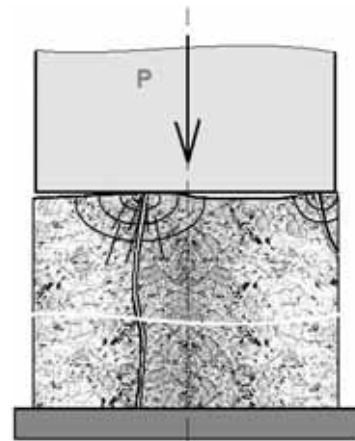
Chipping and destroying during axial test on fracture of sintered piece of uranium dioxide.
